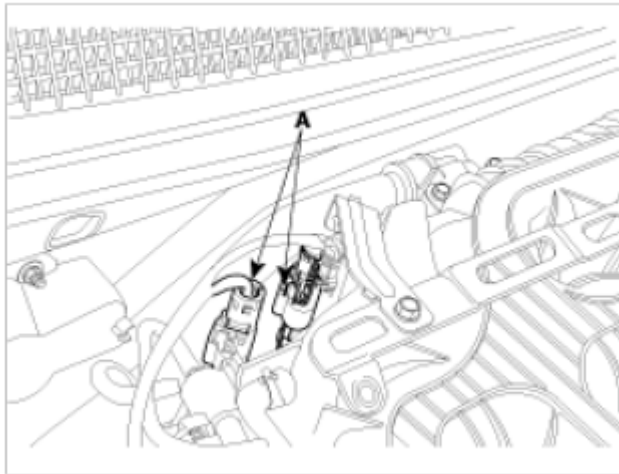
Identifying Oil Level Gauge And Front Oxygen Sensor Connector
